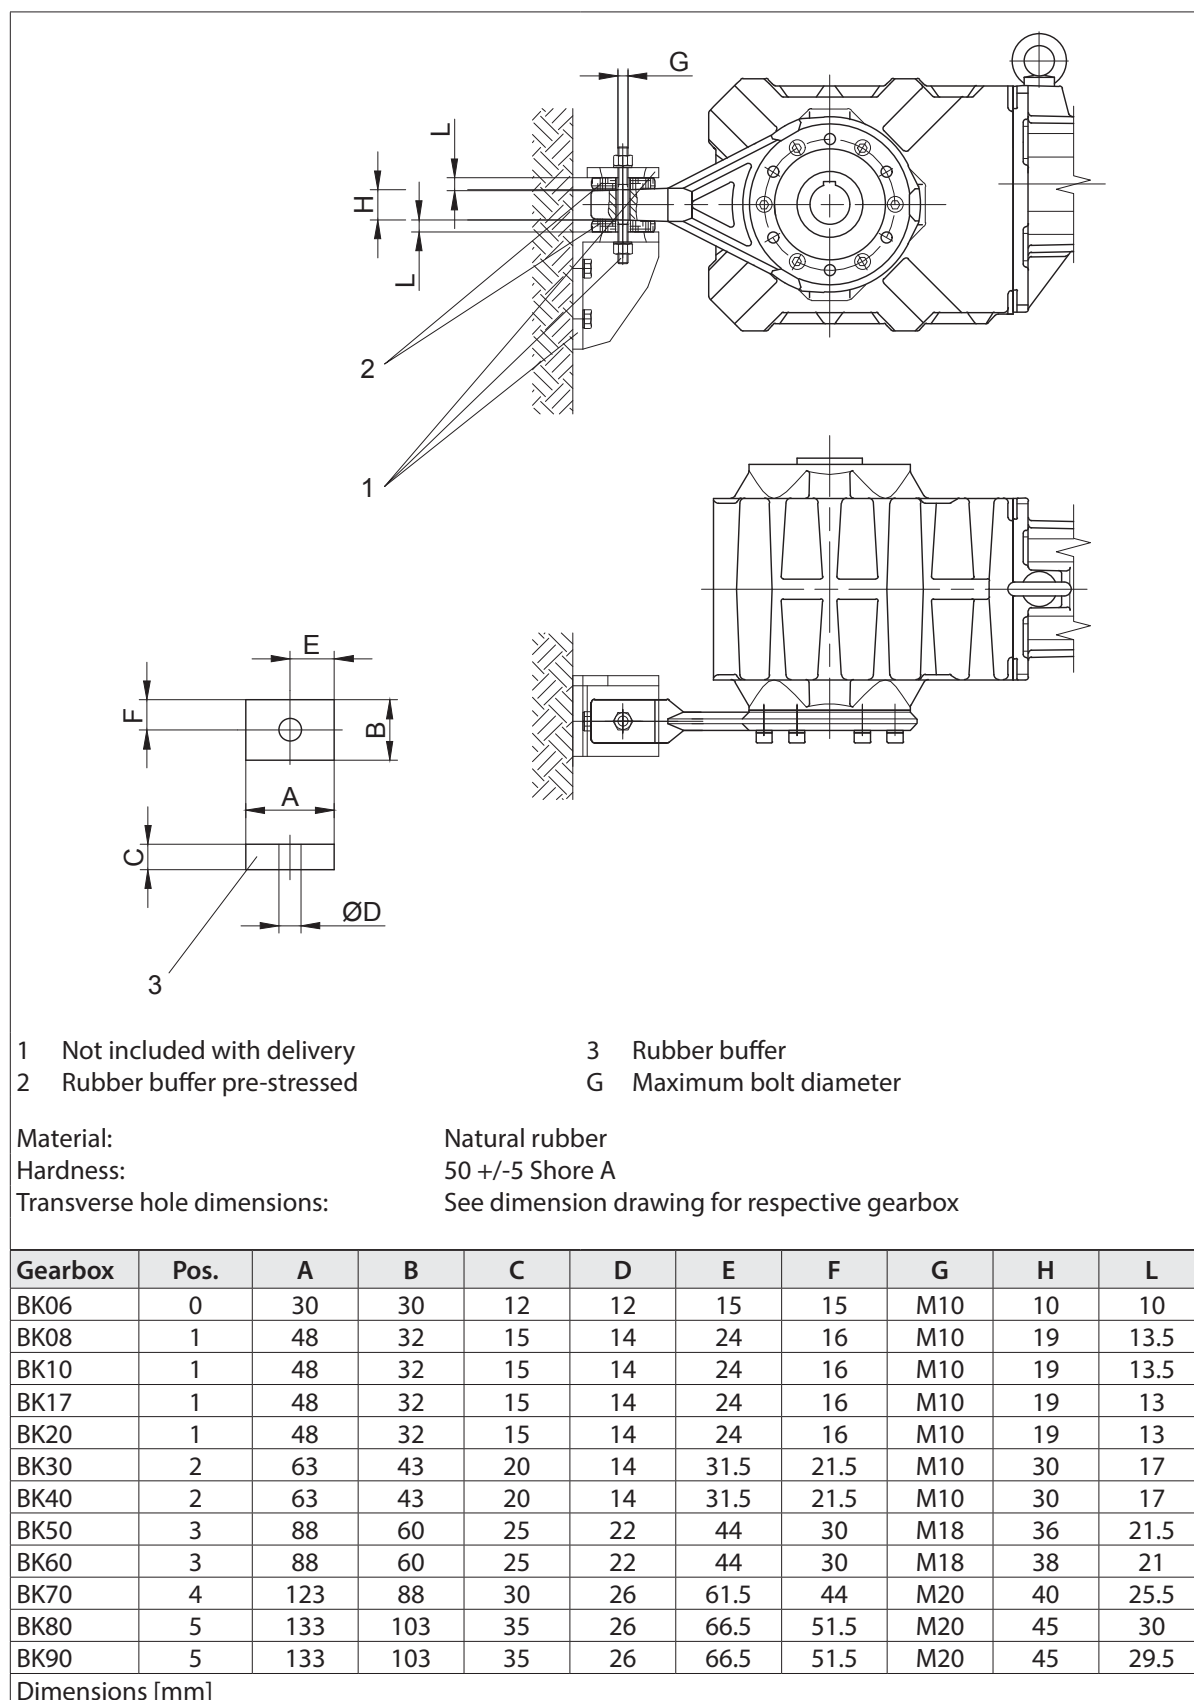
Rubber buffer, bevel gearbox, dimensions
